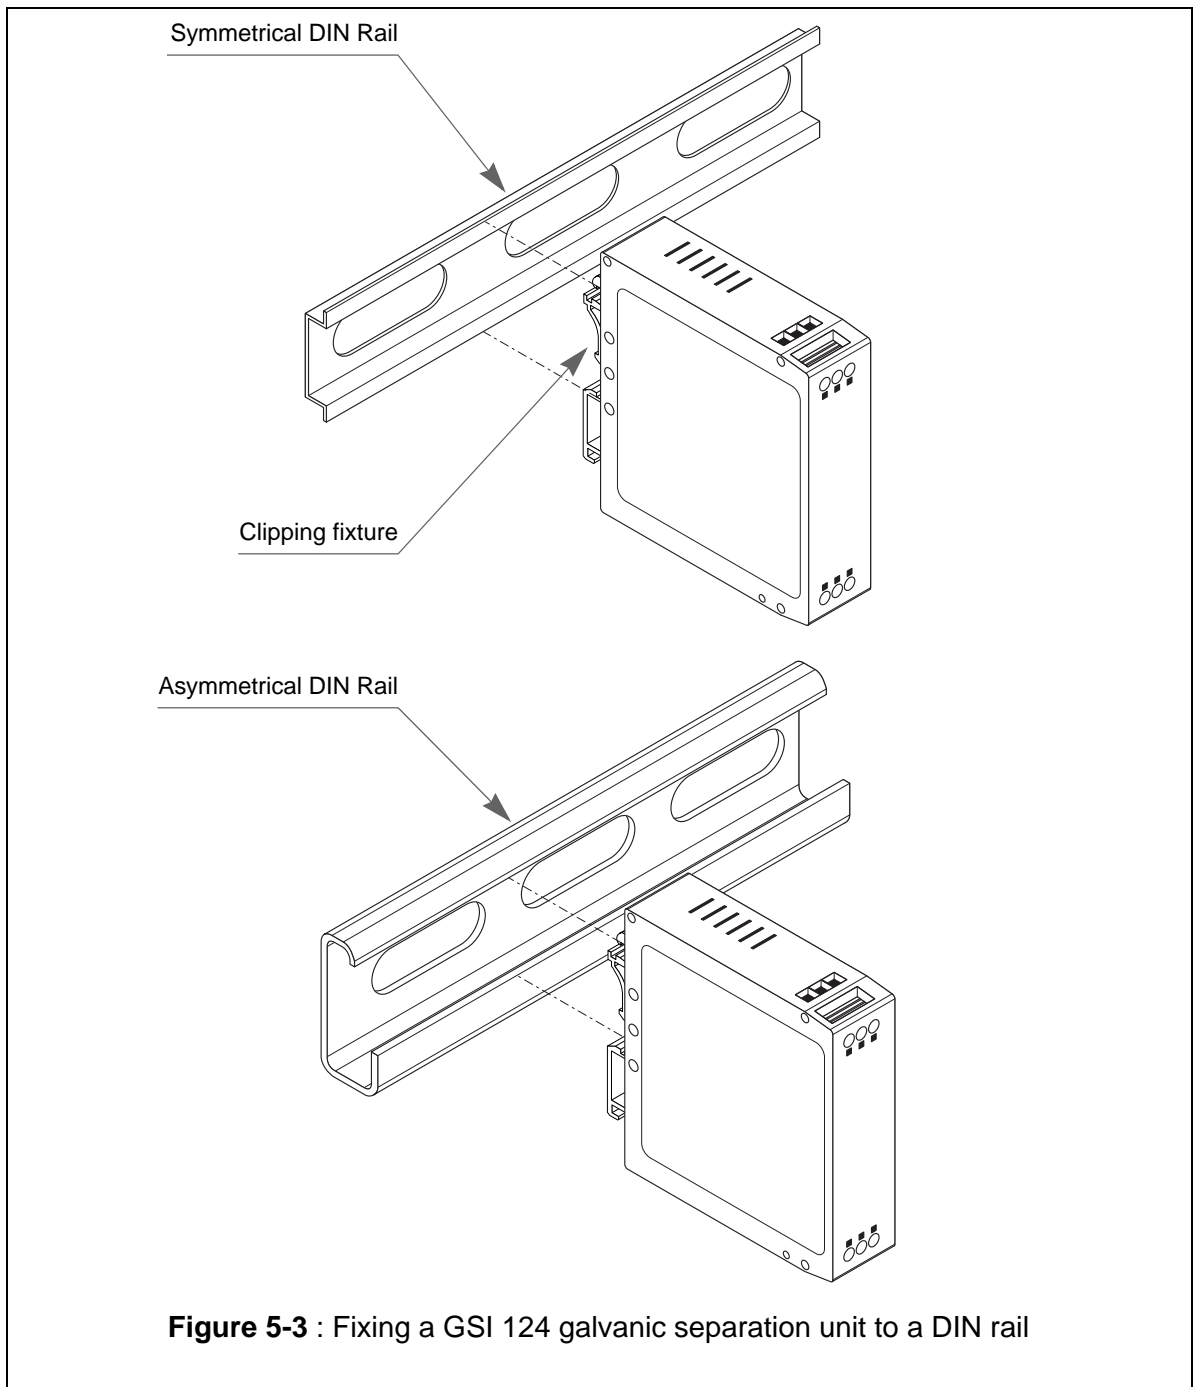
Fixing a GSI 124 galvanic separation unit to a DIN rail
